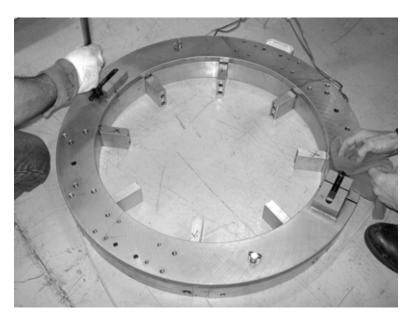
Assemble the machine on the floor for use on an open-ended pipe.
